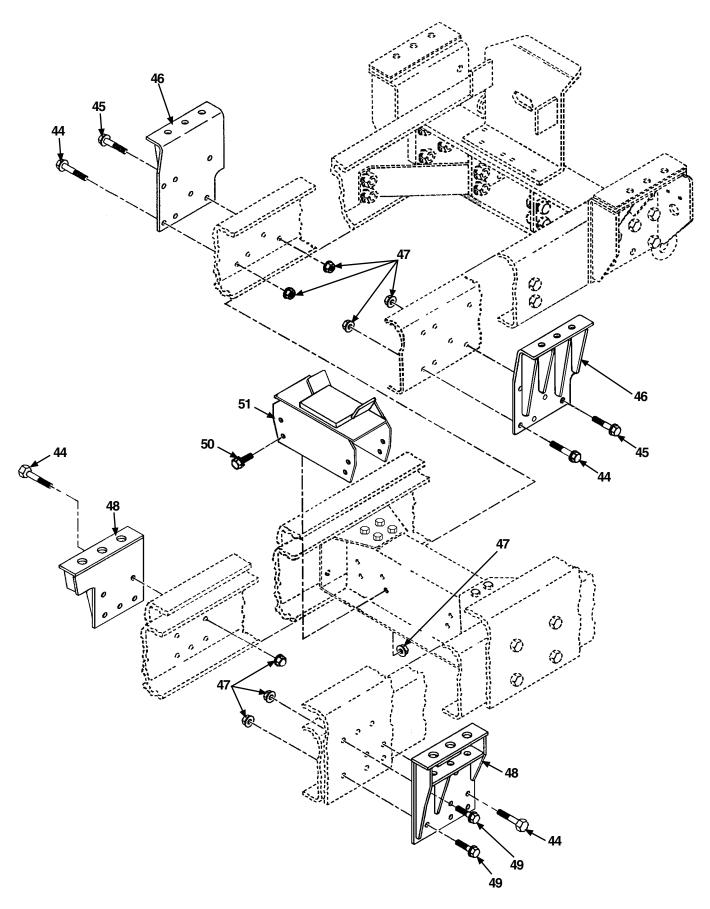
A. Load Handling System (Model B Only) (Sheet 2 of 2)
